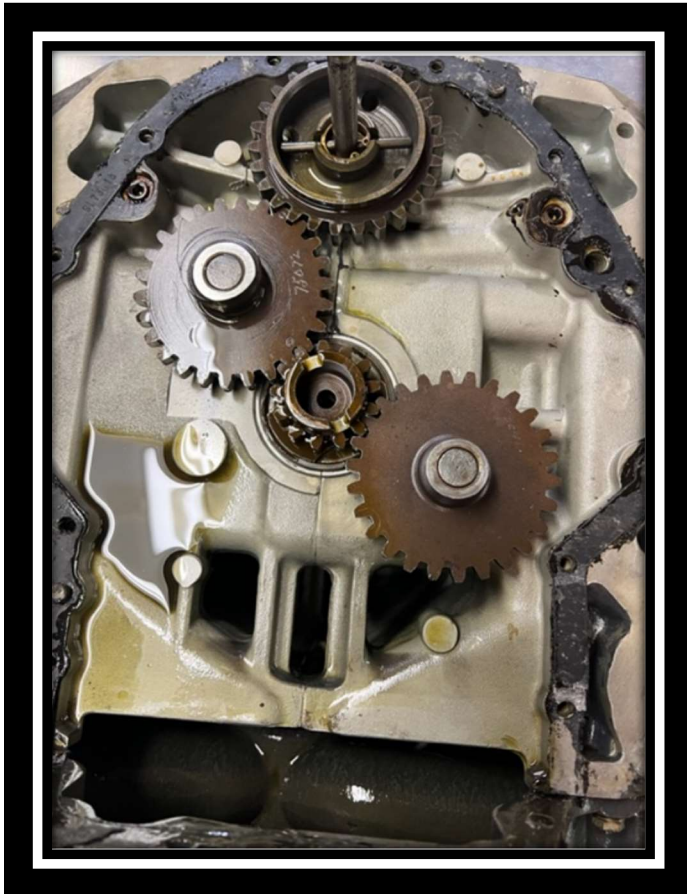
Crankshaft Gear Missing Hold Down Bolt, Image of gear assembly immediately after accessory cover removed.
